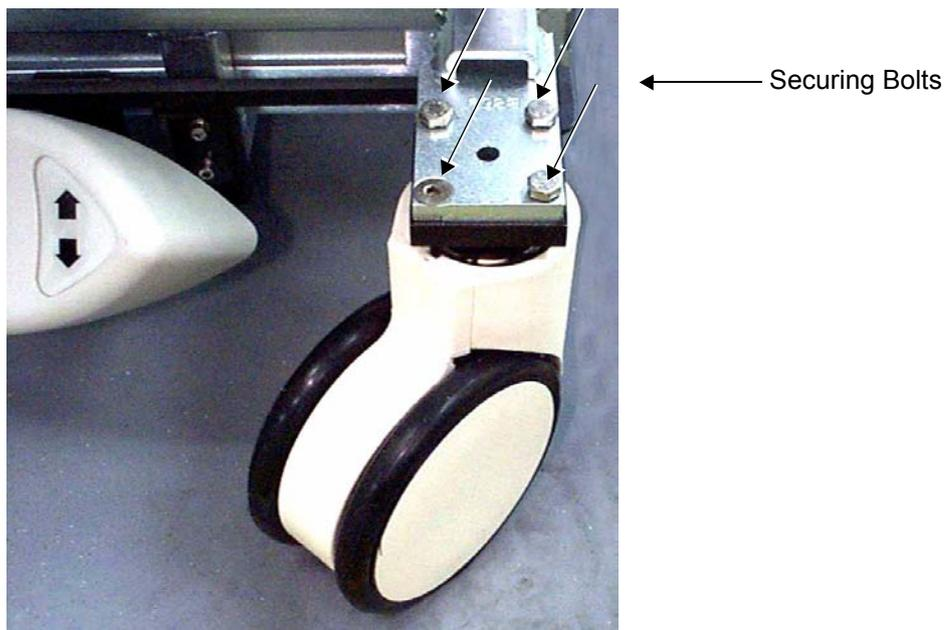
Front Wheel (Part No 2392789) Bolted to Chassis
